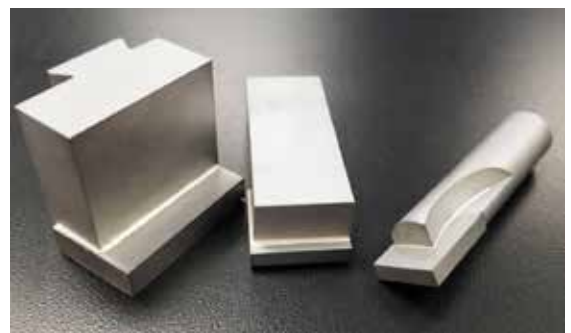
Brazing of carbide cutters and steel bases using braze shim preforms.
